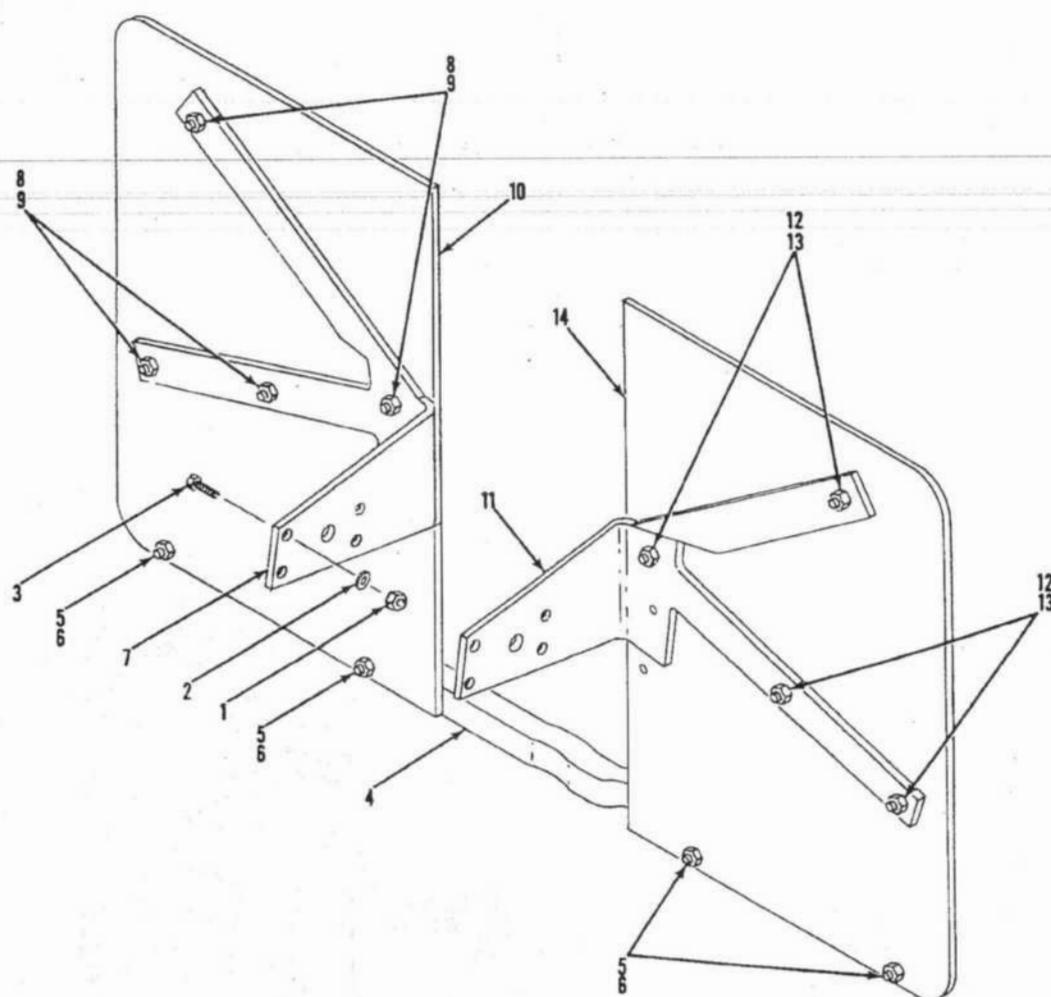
20 MM Shield (MK 5 MOD 0, MK 7 MOD 0)
